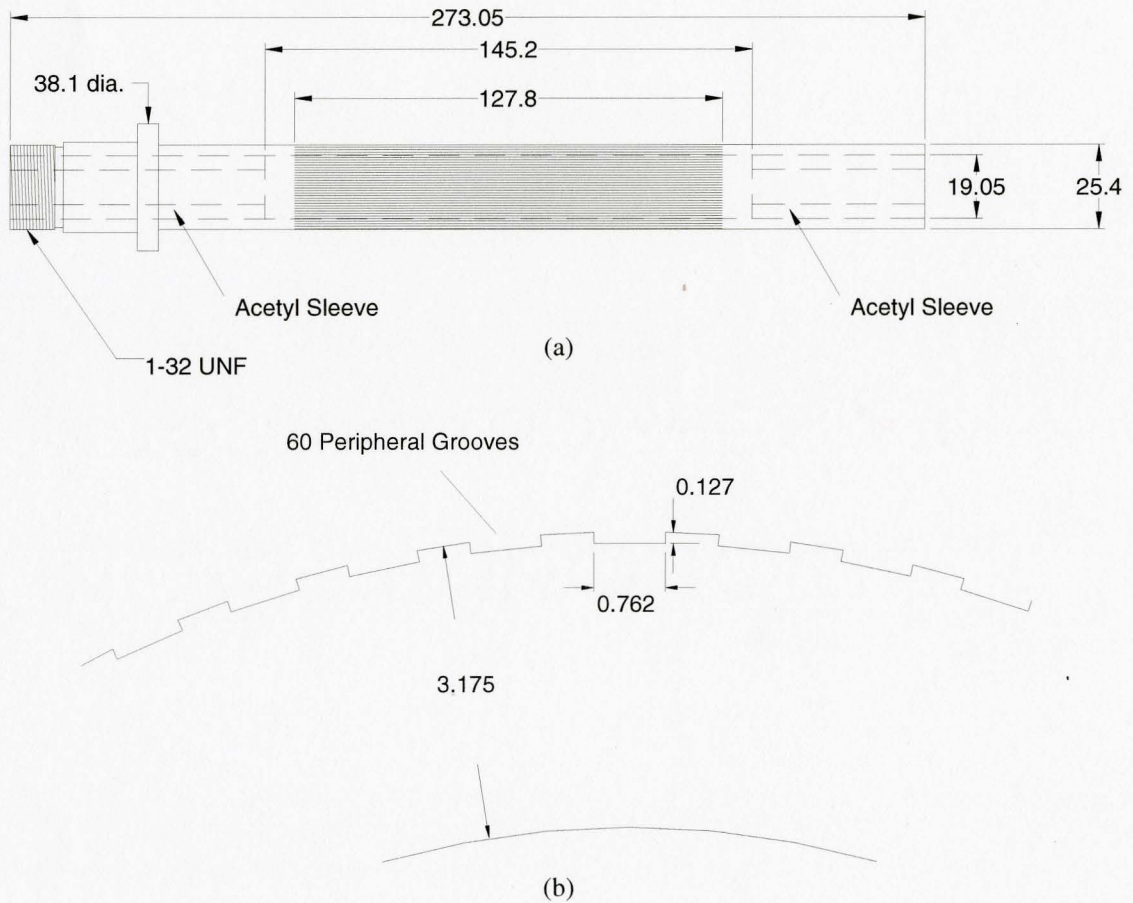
(a) schematic of the axial grooved test section, (b) detailed drawing of the axial grooves; all dimensions in mm.
